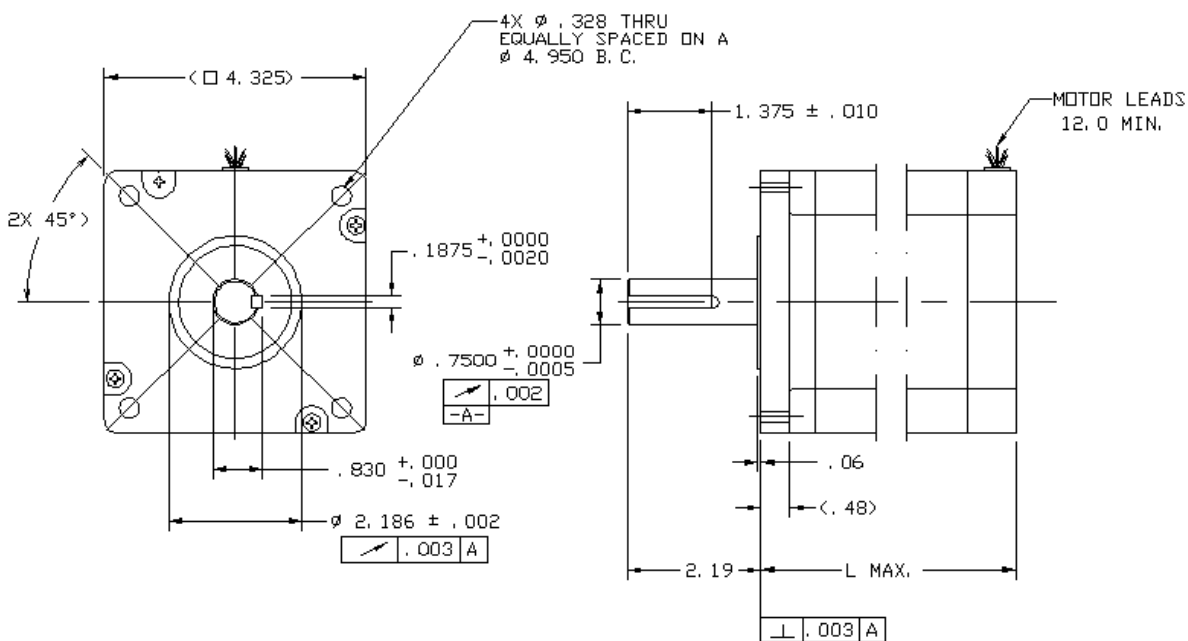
1N40 Series NEMA 42 Stepping Motor Dimensions
